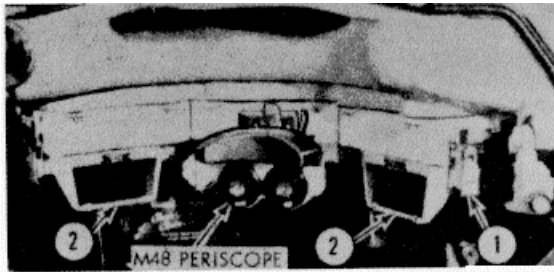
Removal/disassembly/assembly/installation - M37 loader's periscope mount and seal
